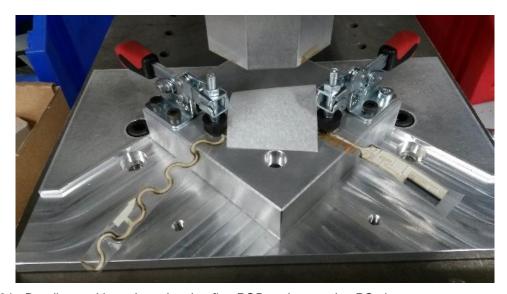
Bending tool in action, showing flex PCB and protective PC sheet
